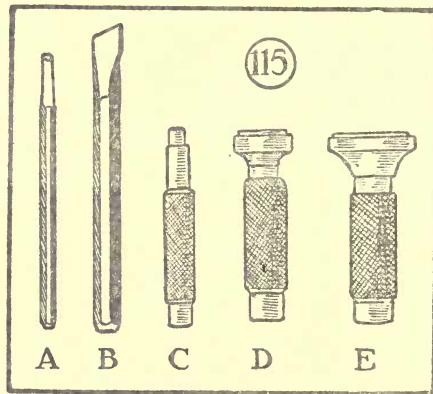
A is a spindle body bushing bracket, B an inner or outer ball race remover, C a spindle arm bushing driver, D a front wheel outer ball race driver, E a front wheel inner ball race driver
